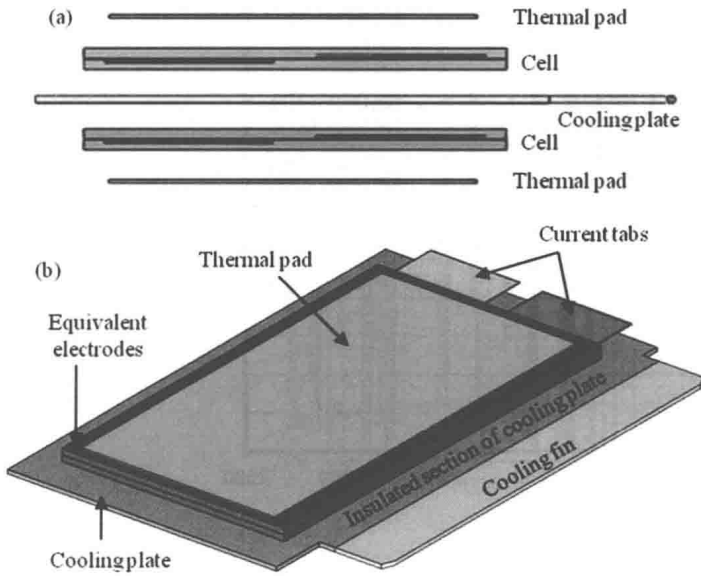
Basic cooling unit of the battery module: (a) exploded view; (b) assembled view with a single cell.
